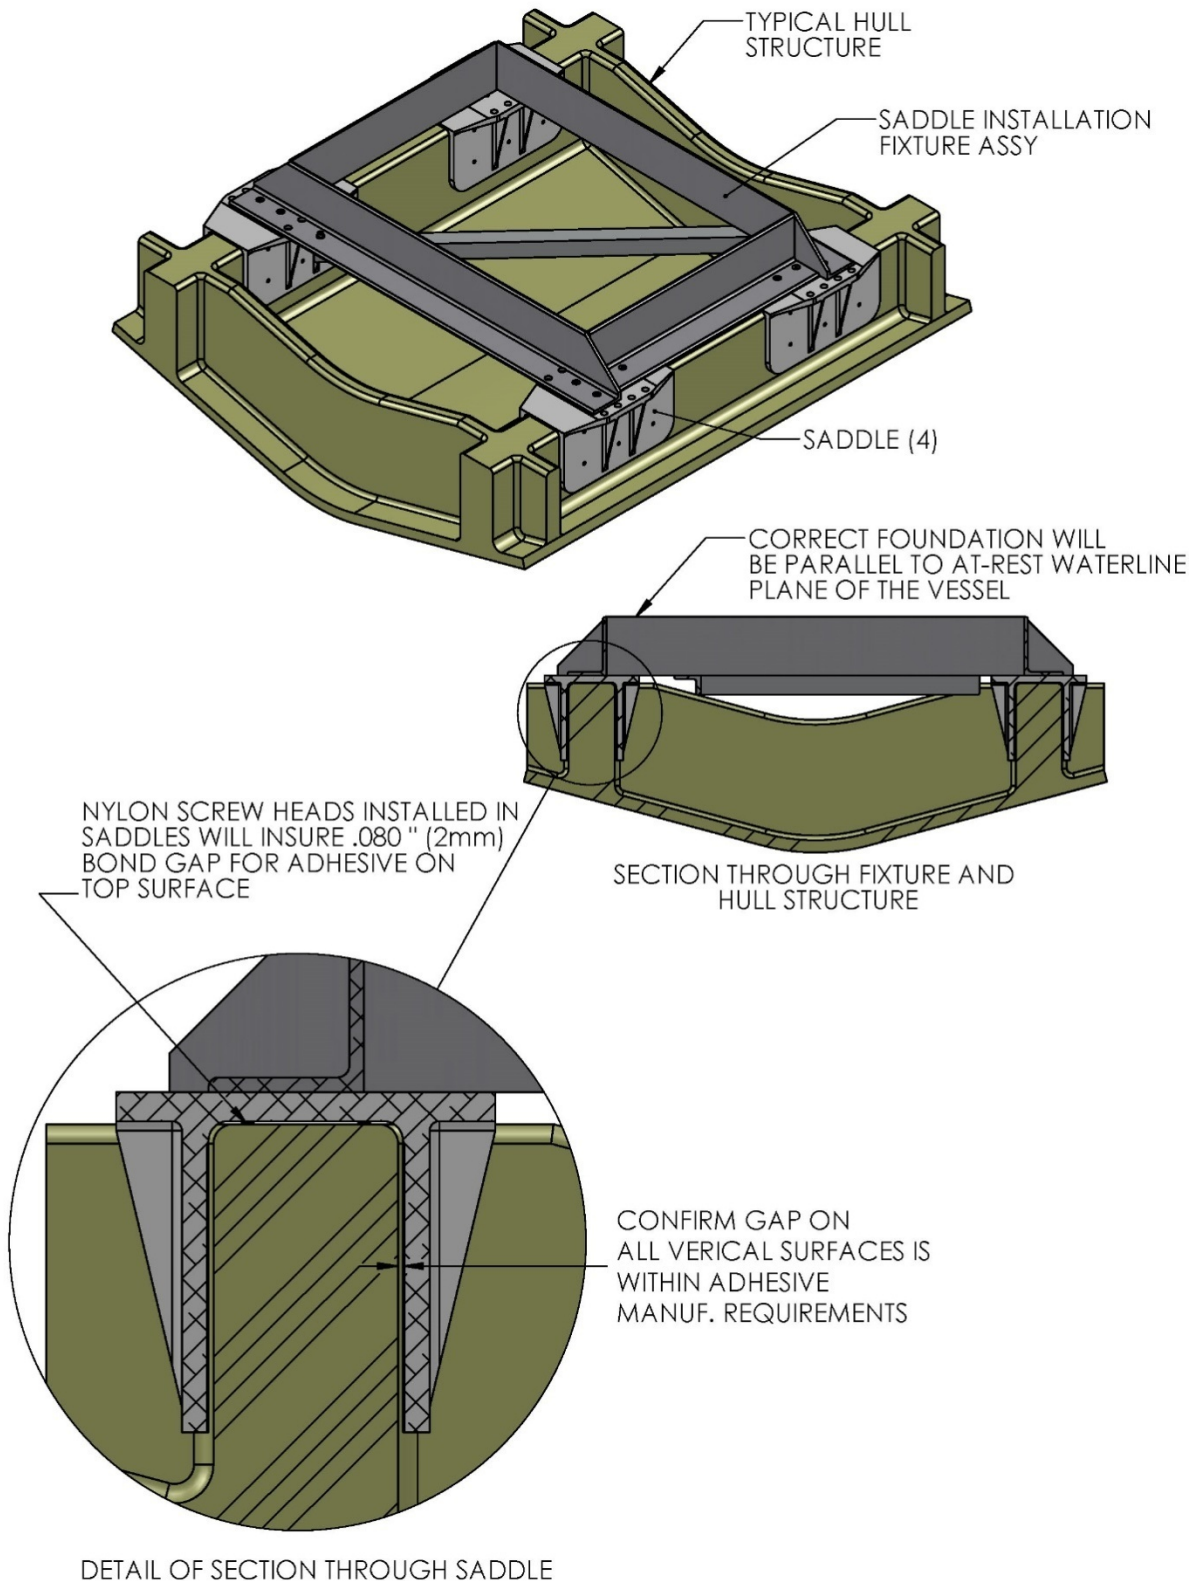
NOTICE FOR CHECKING SQUARE OF ASSEMBLY
